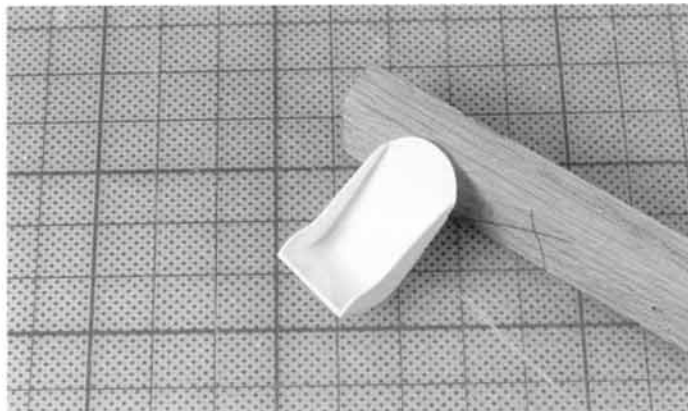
Carefully sand the sides to smooth out the plastic joints by running the sides along stationary pieces of 400- to 600-grit sandpaper.
